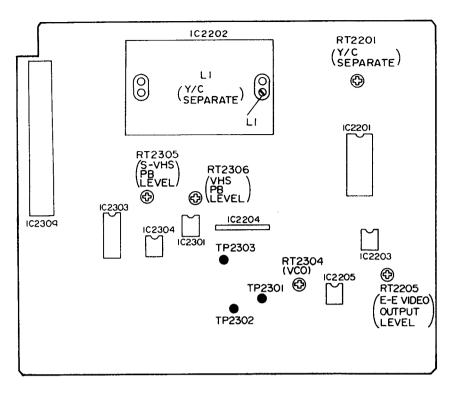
Components on Y/C Separation Circuit Board (Components Side)
